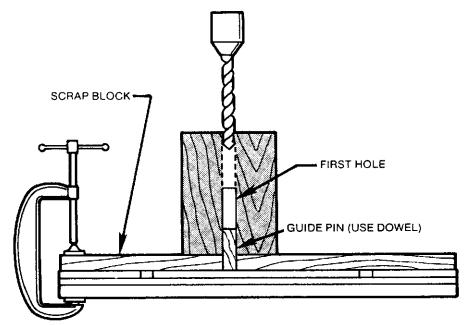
This is one way to drill from both ends of extra-thick stock. The work, positioned over the guide pin, is accurately placed for the second hole.
